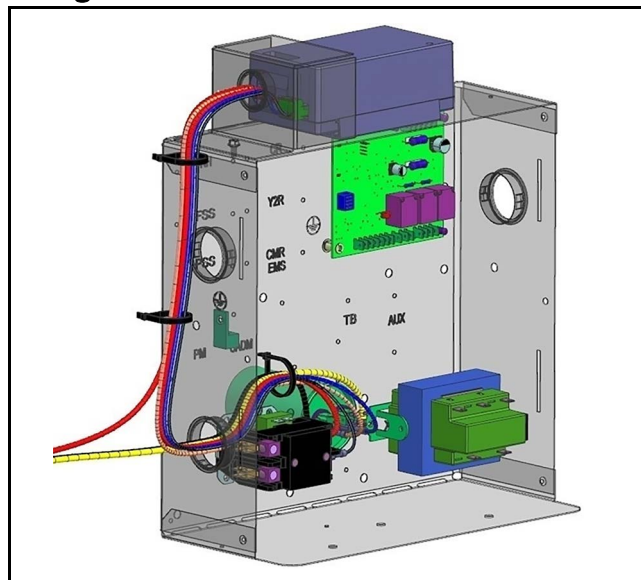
Overview of Wiring Layout with SSA Installed (LM model)
